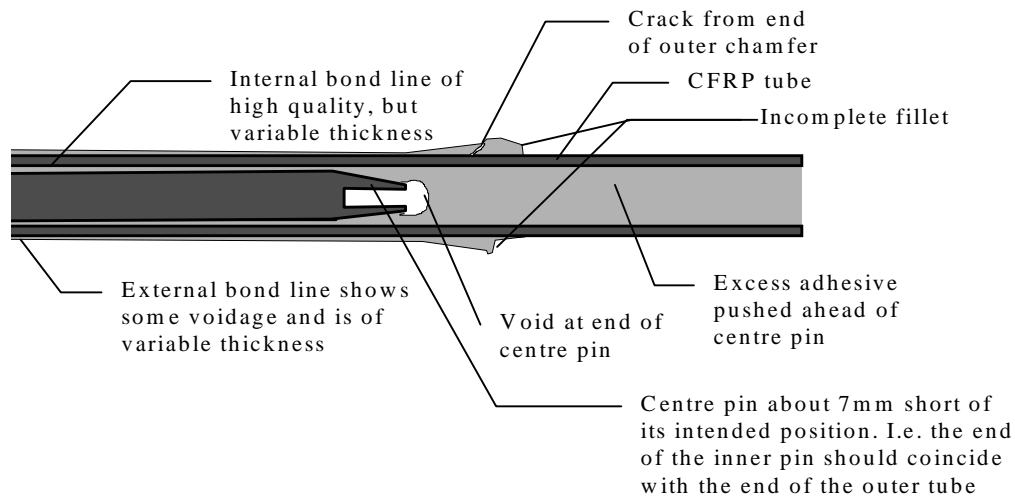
Cross section through failed joint. (Outer adherend not shown).
